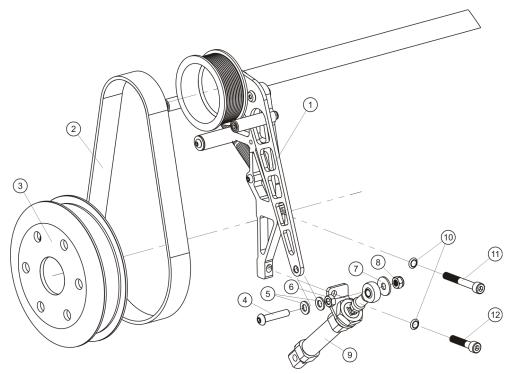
Pre-rotator clutch - belt, pulleys and actuation (lower engagement)
